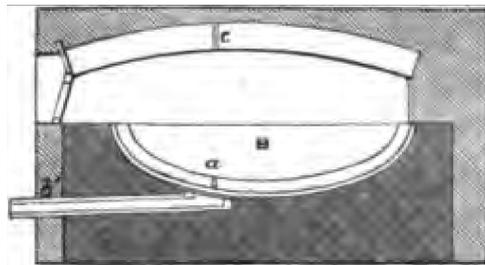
is an elevation; Fig. 83 a horizontal section at the level of the top of the pan; and Fig. 84 a vertical section through the tap hole. The fireplace A is separated from the pan B, by a bridge 3 feet 3 inches wide, and the furnace is provided with two doors *b*, through which the dross may be removed. In principle this resembles the ordinary softening furnace with its cast iron pan, but its greater size and solidity of construction render it much more economical than the furnaces usually employed for the purpose.
